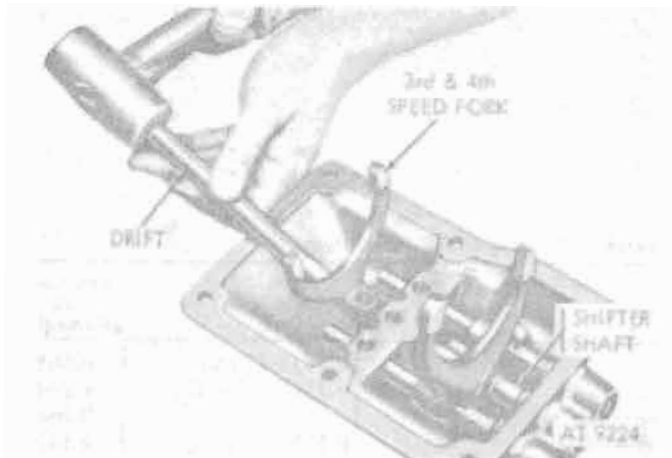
Driving third and fourth speed shifter shaft rearward.
